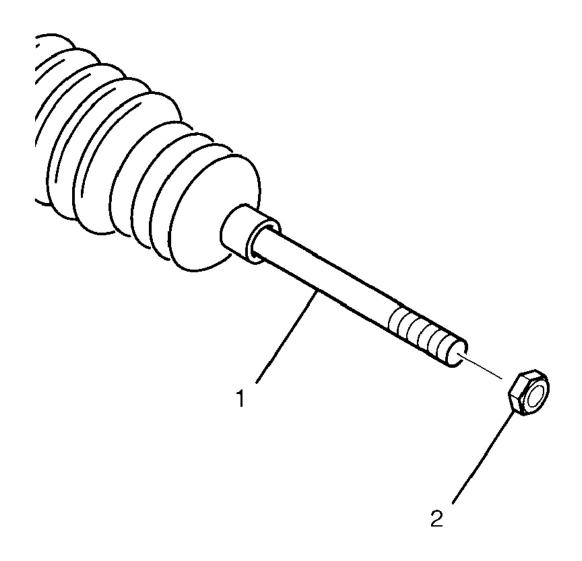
View Of Inner Tie Rod & Hex Jam Nut Courtesy of GENERAL MOTORS CORP.
